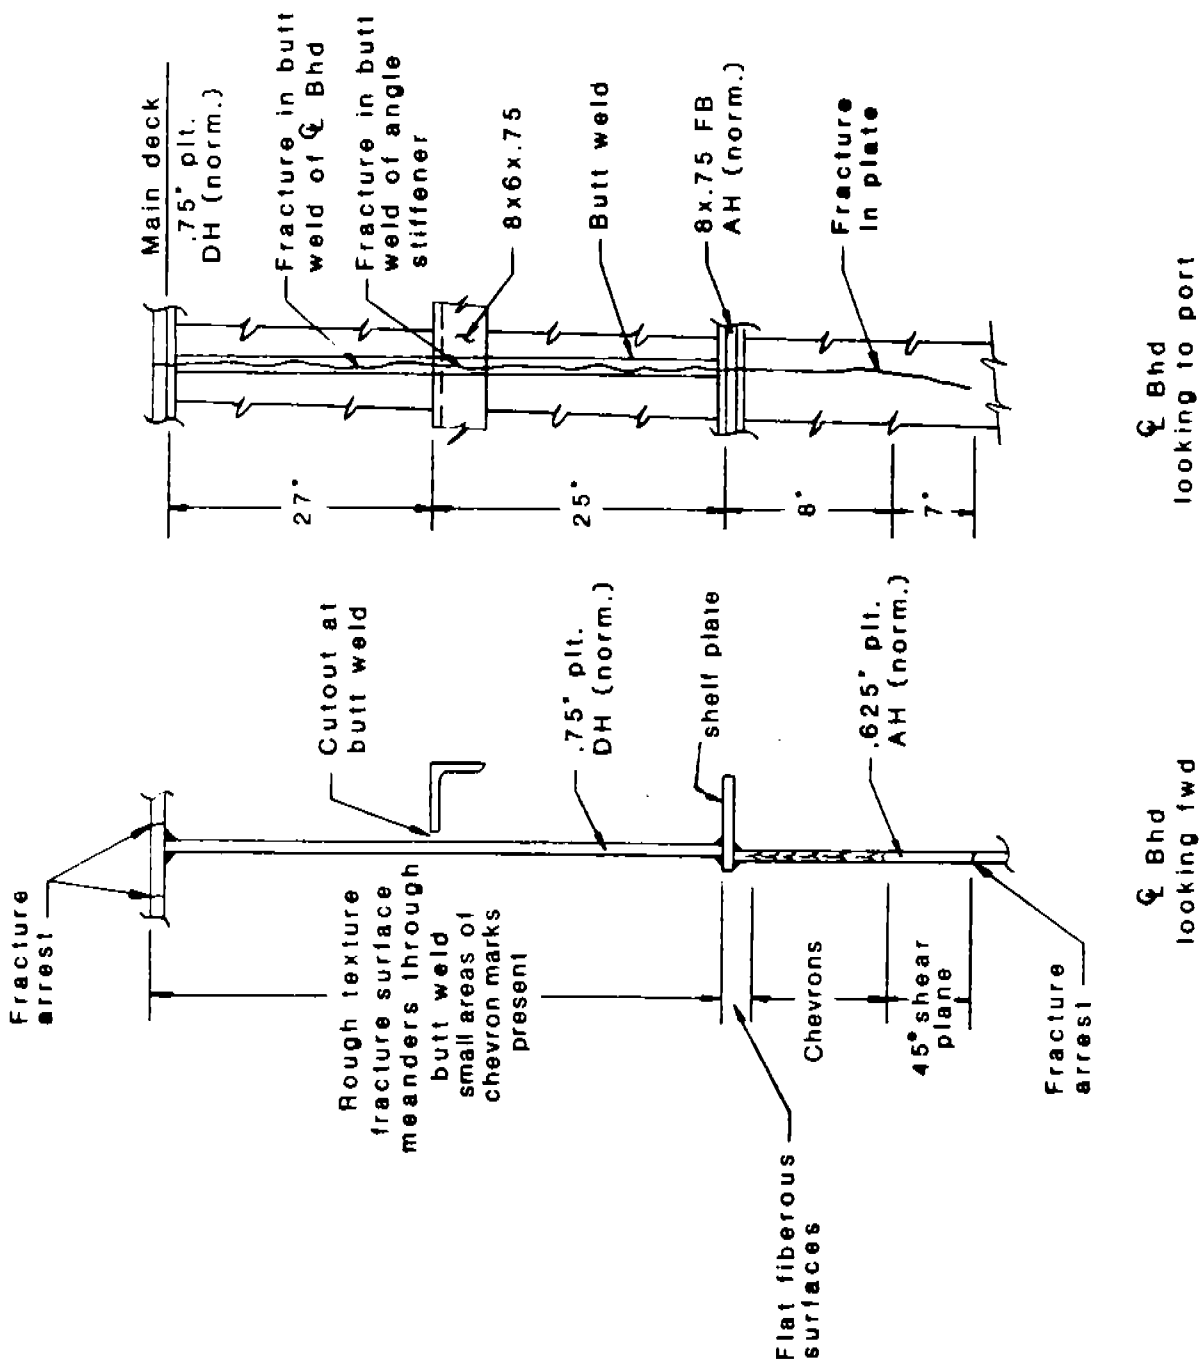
Key Illustration of the Longitudinal Bulkhead Fracture
